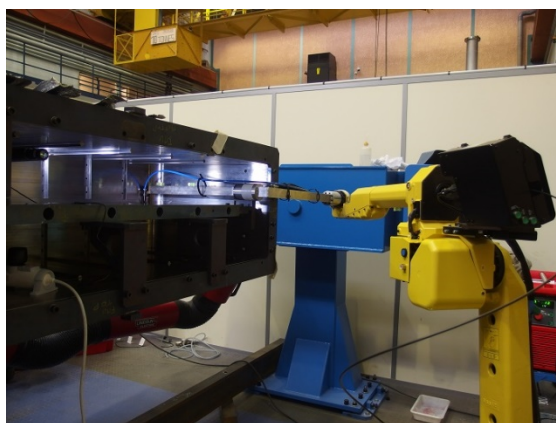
Robot carrying out gas tungsten arc welding on a full-size TBM mock up
